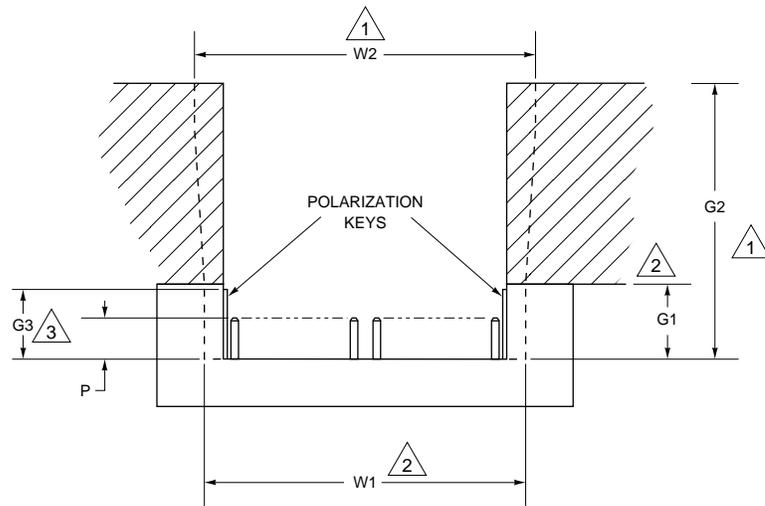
Recommended One Row Surface Mount Connector PCB Footprint
